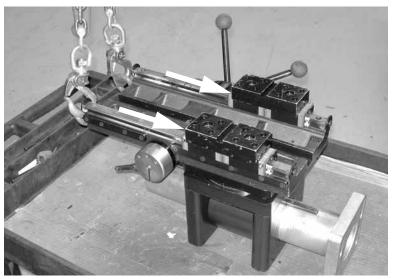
Tip the machine back for assembly. Move the feed slide blocks down to the bottom of the rails.
